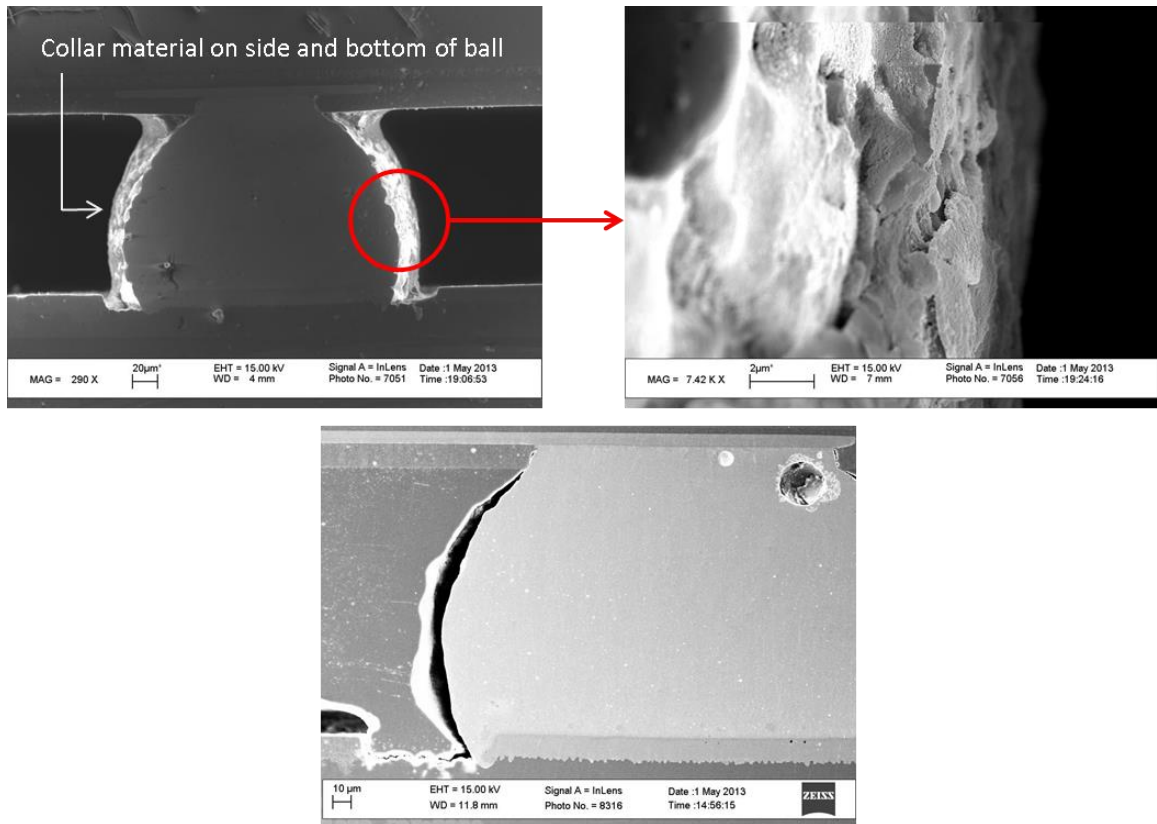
Leakage of material onto ball and PCB after assembly with 1000 rpm collar(top), solder joint without collar
